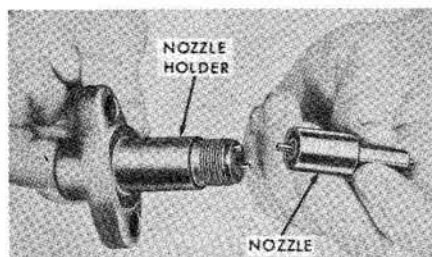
When positioning nozzle and needle on injector body, be sure that dowel pins are correctly aligned in nozzle.
